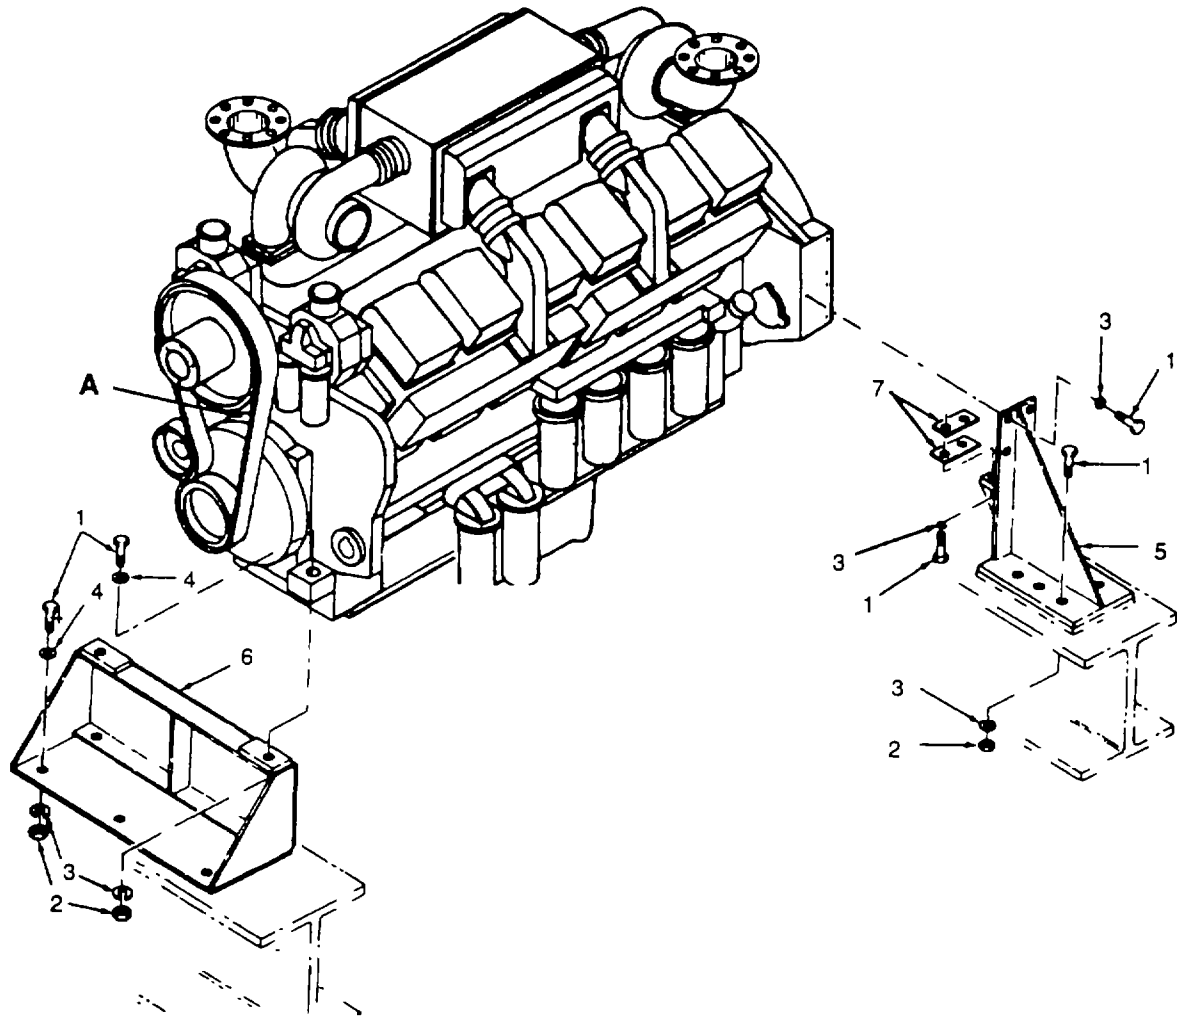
Engine Assembly and Related Parts (Sheet 2 of 2)
